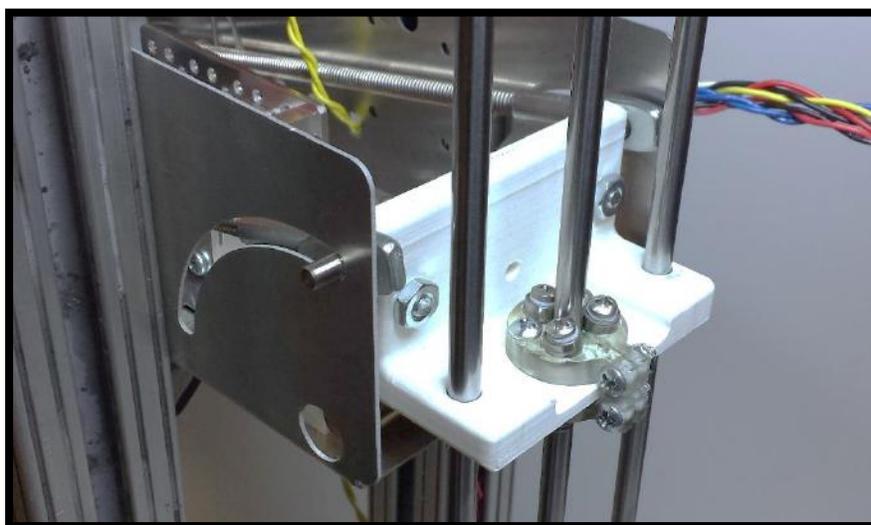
Threadless ball screw assembly mounted on U-shaped channel, assembled.
